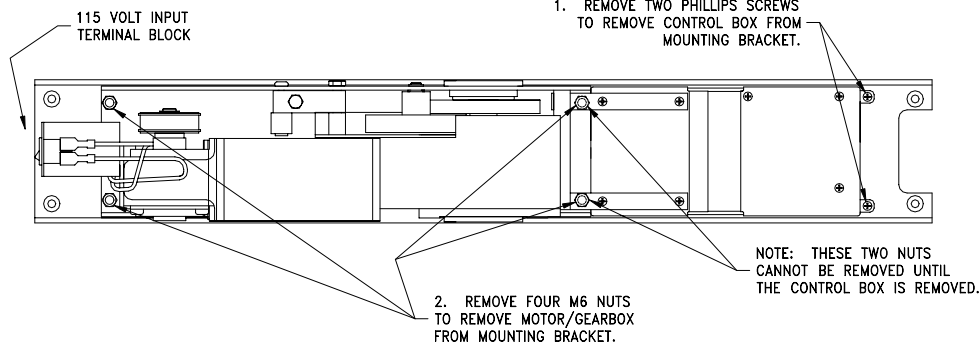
MOTOR/GEARBOX & CONTROL BOX REMOVAL
